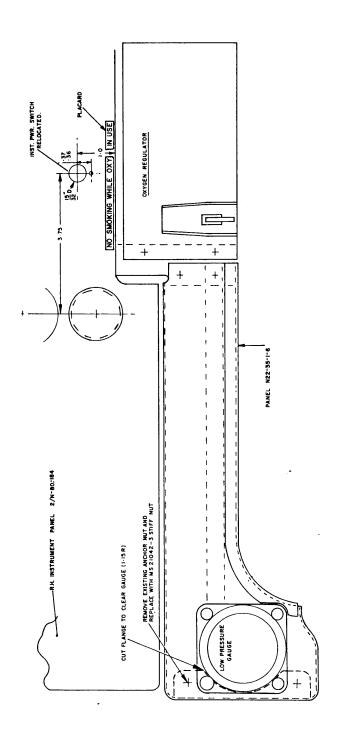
RH INSTRUMENT PANELS ASSEMBLY REWORK
